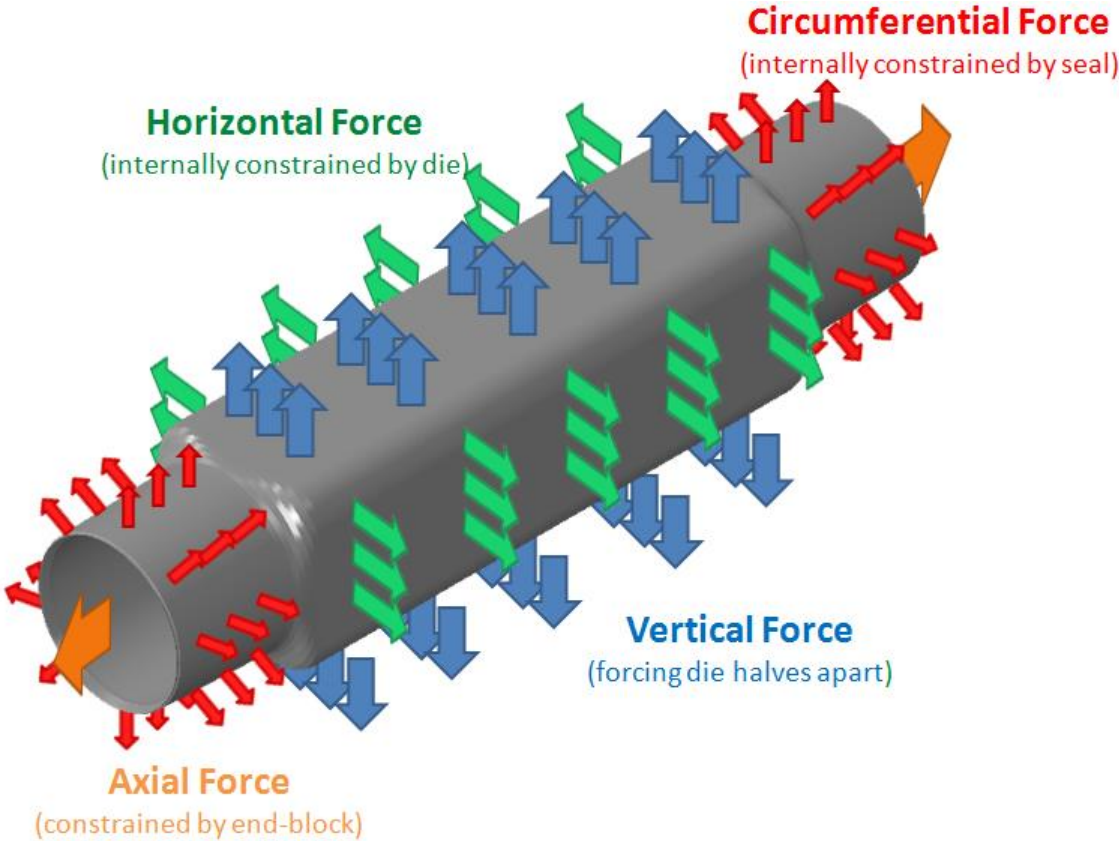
Loading of the machine dies due to formed part at full pressurization.
